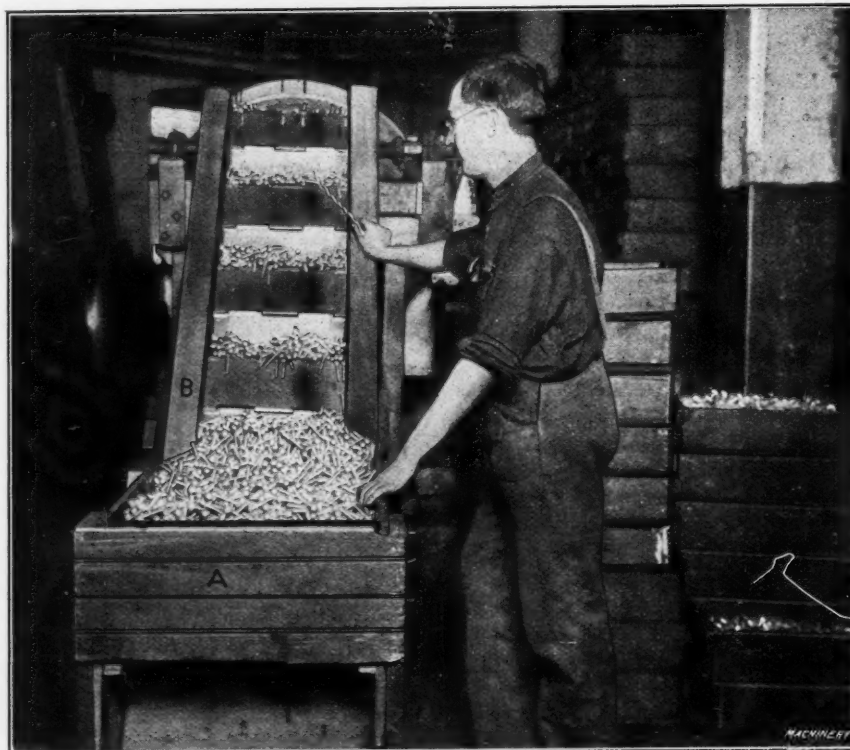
The Feeding End of the Rotary Furnace, showing Conveyor Method of carrying Bolts from Boxes to Screw in Furnace Drum
